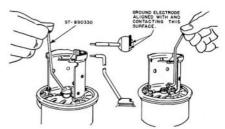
CHECK PLUG ALIGNMENT AND GAP
